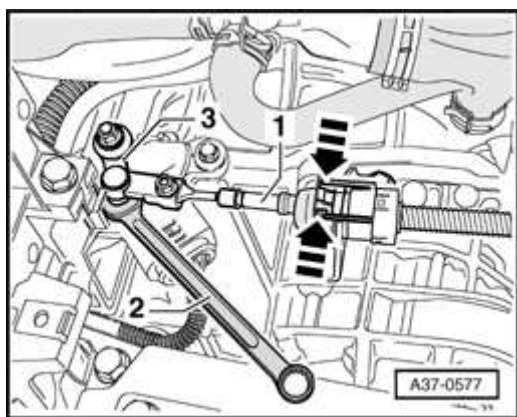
Prying Selector Lever Cable From Lever/Selector Shaft Using A 10 mm Open-End Wrench
